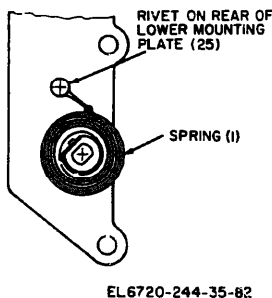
Spring location (spring (1) from fig. 3-9).
